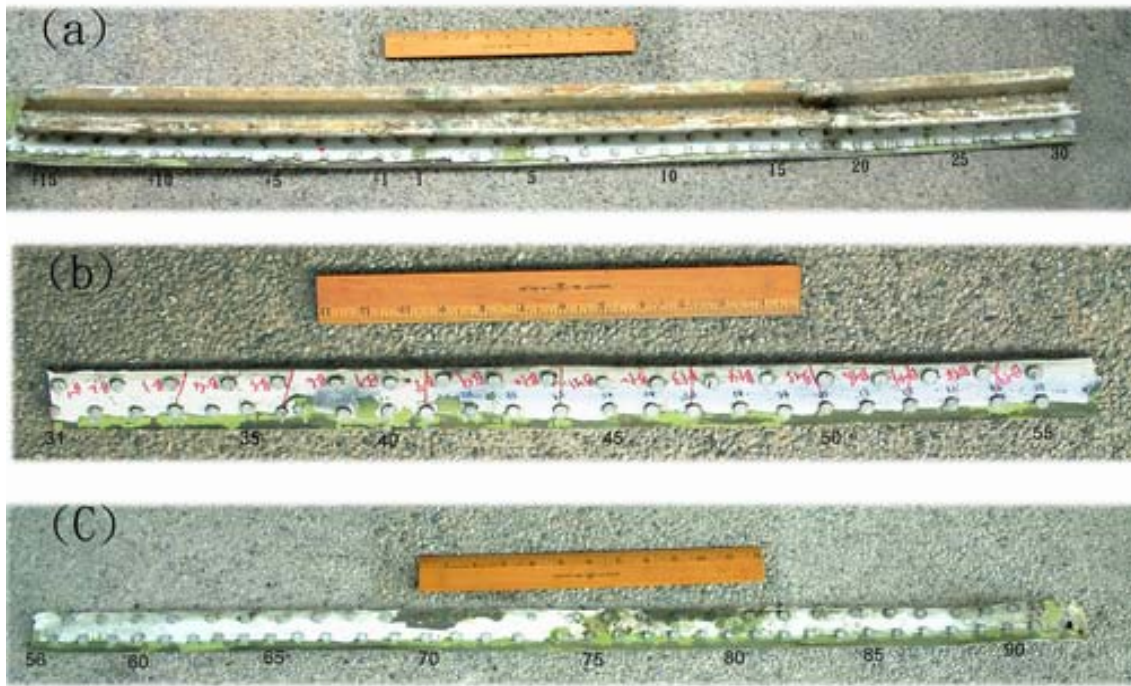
Three sections of the skin fracture incorporating rivets and doubler sections were removed by saw cutting
